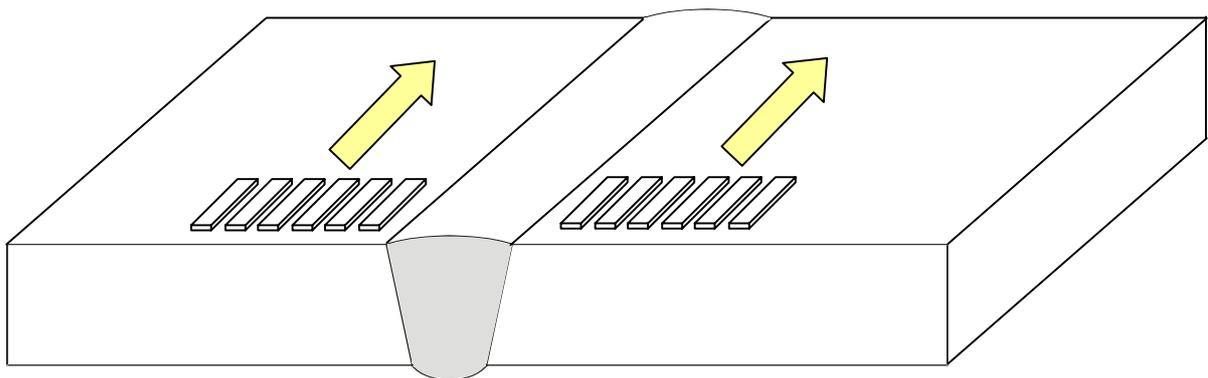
Transducer Array for Detecting and Evaluating Longitudinally Oriented Flaws; the Search Unit is Moved Parallel to the Weld
